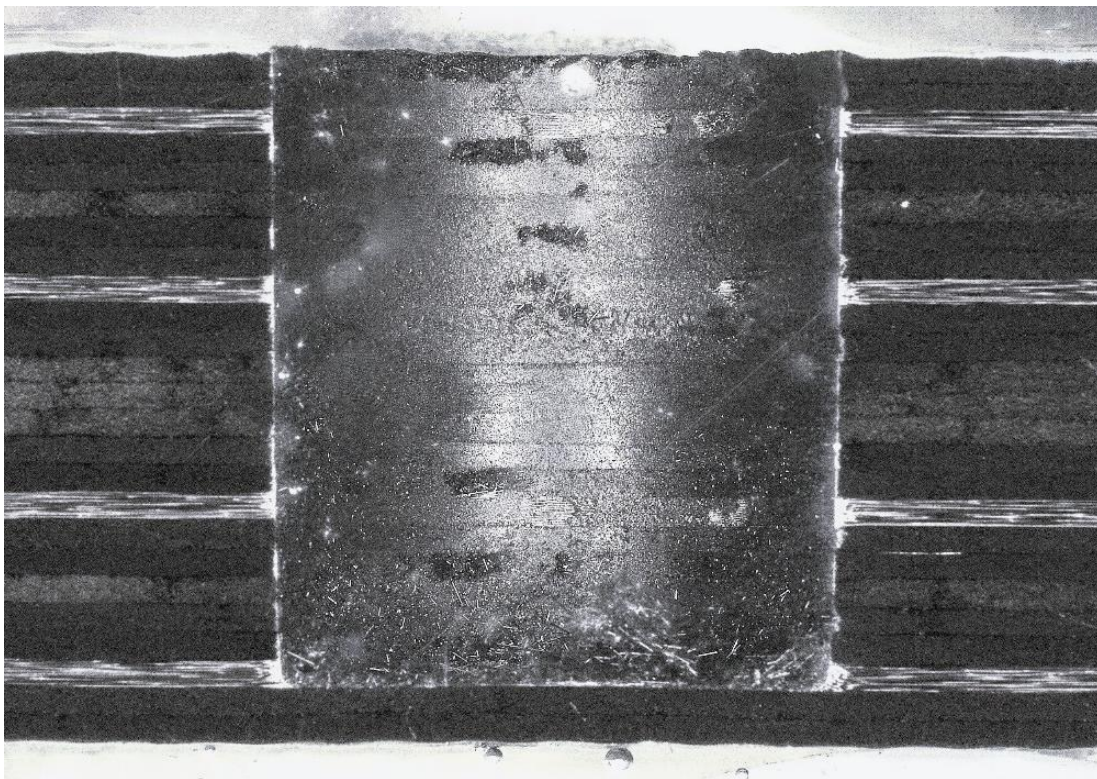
Hole NV-01: Drilled hole without vacuum jig of specimen CSAI - RPR - S - 20J – 1.
